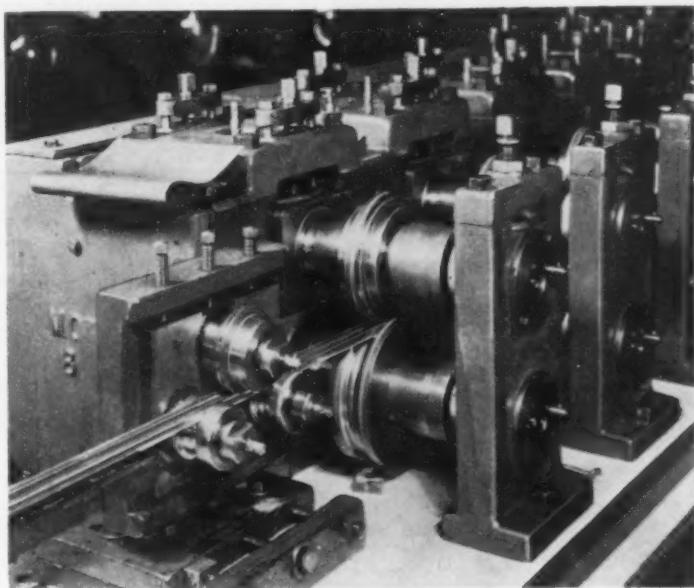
Proper bend radii are important in form rolling sections like this 430 molding to be used for auto trim. Courtesy Republic Steel Corp.
